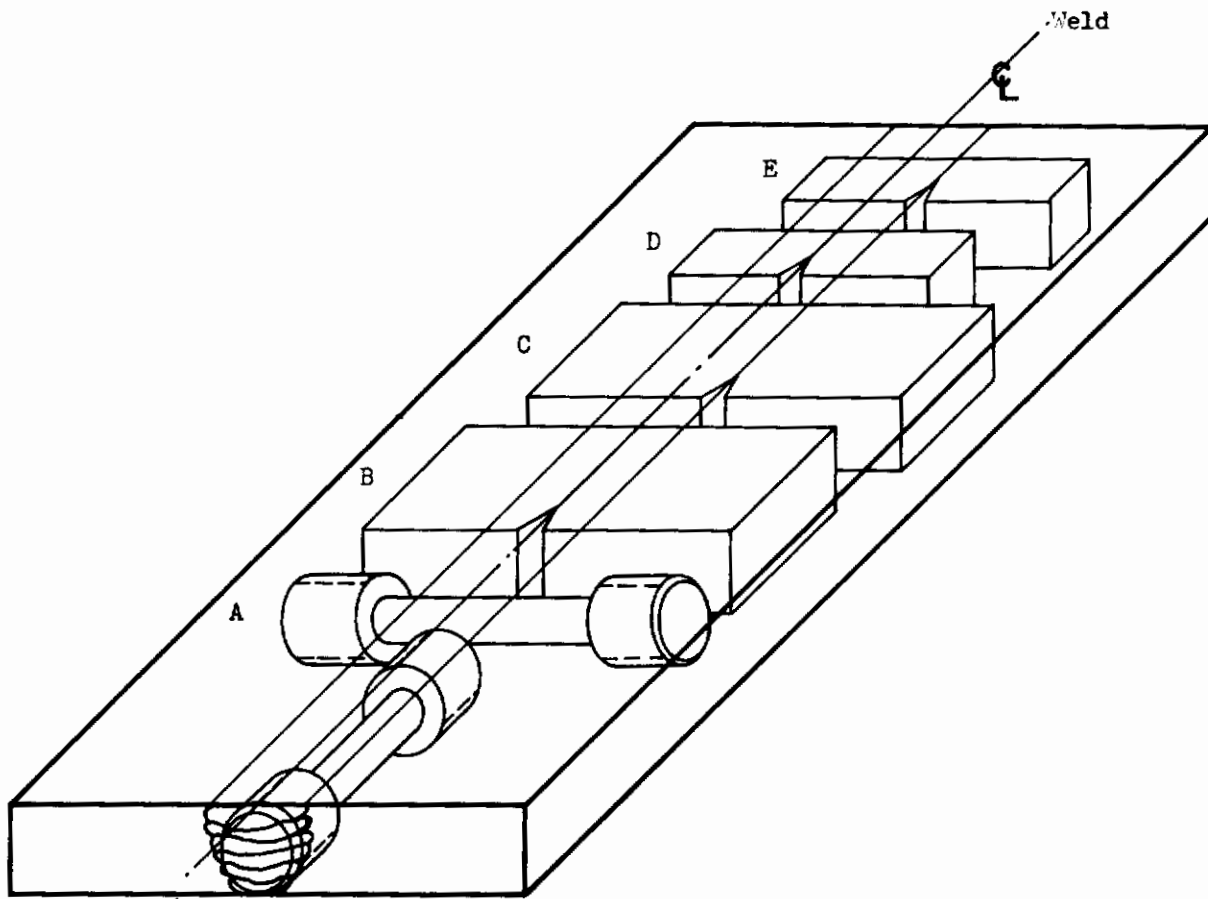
Orientation of Weld-Joint Test Specimens
